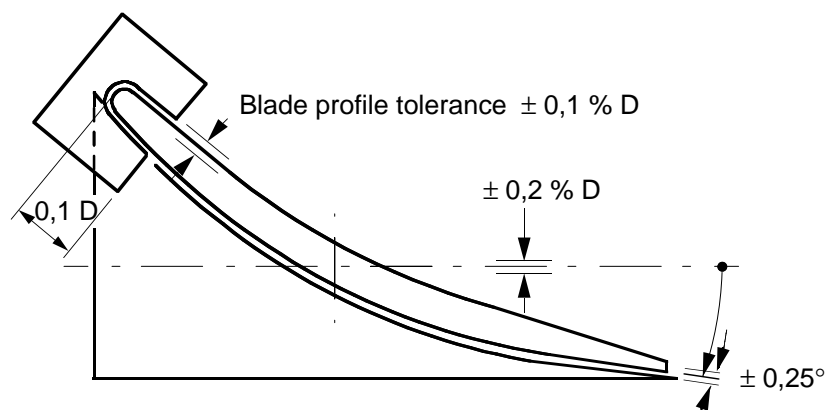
Runner/impeller of axial flow machine. Definition of blade adjustment and of blade profile tolerances
